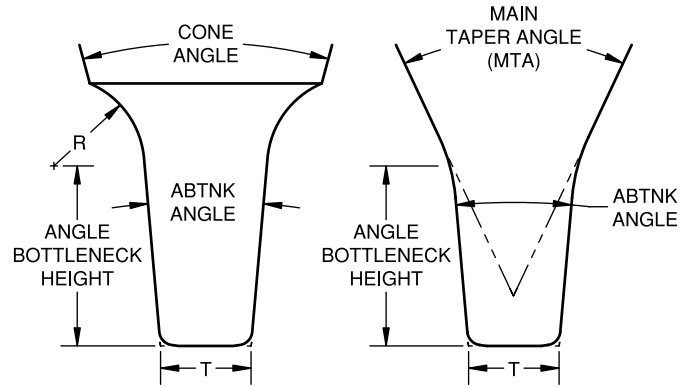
Angle bottleneck (ABTNK or AB) geometry dimensions
